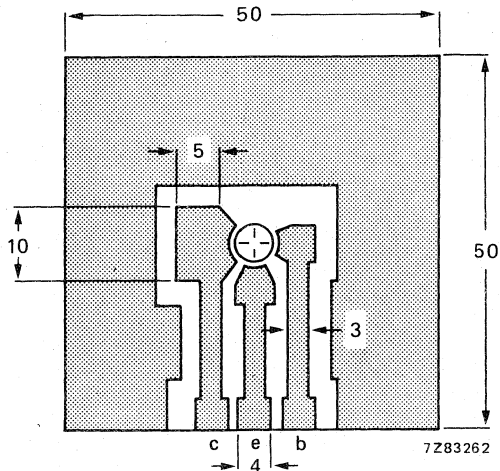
Requirements for fibre-glass print. (Dimensions in mm.)
